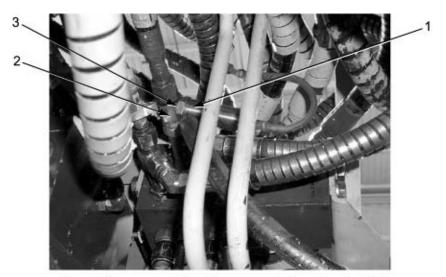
Installation of Hydraulic Hose 13214E2457-18
